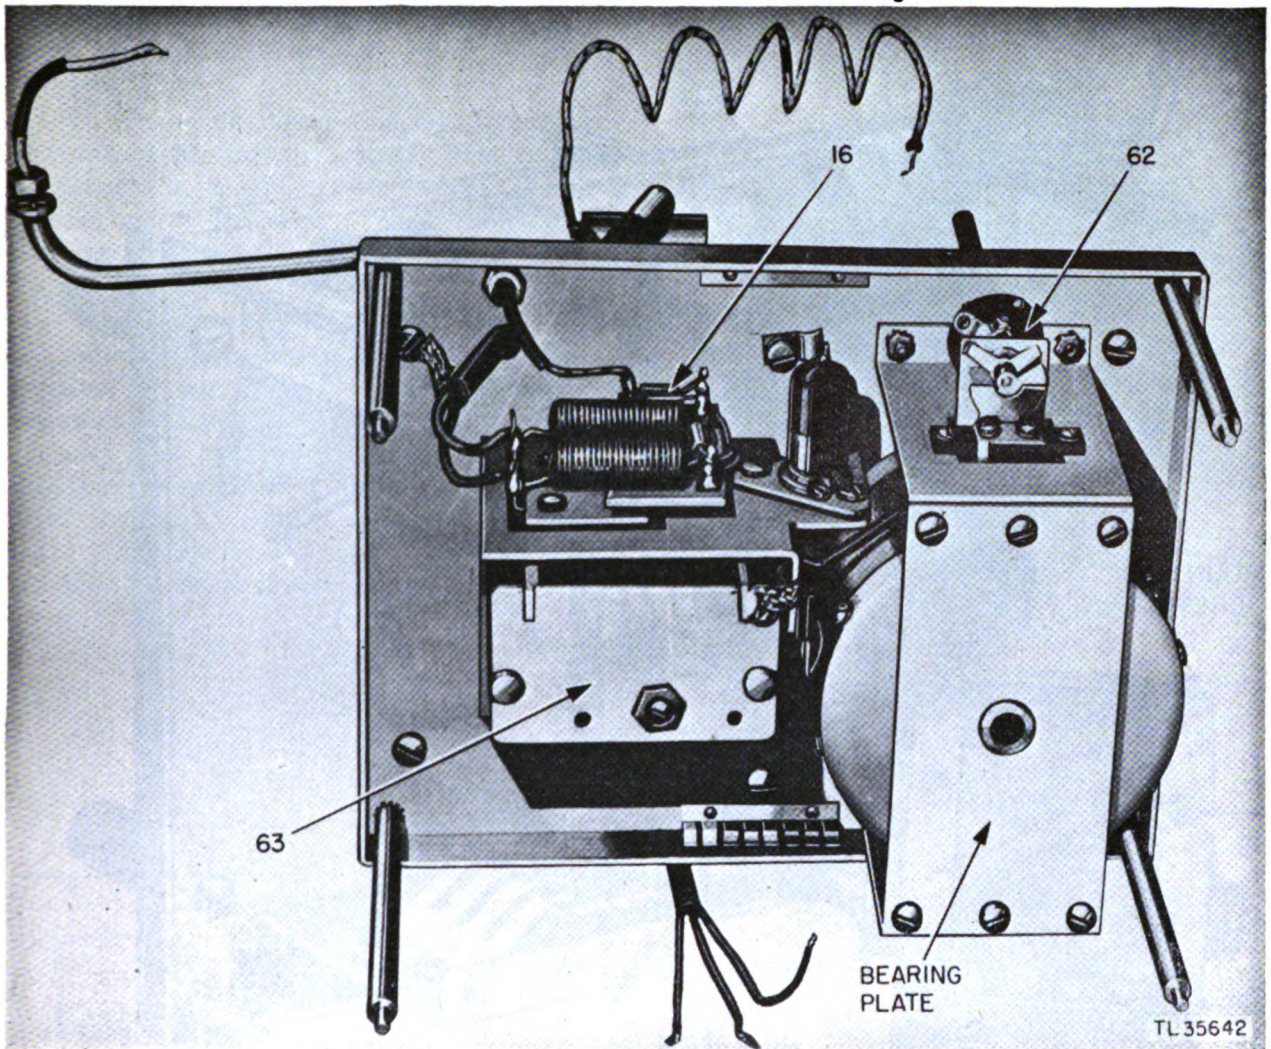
Signal Generator I-222-A, rear view of dial panel.
